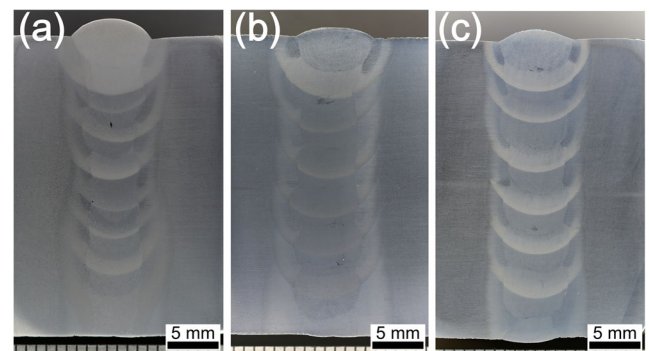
Effect of the feed rate of wire on multi-pass laser welding with filler wire addition: a 4 m/min, b 5 m/min and, c 6 m/min
